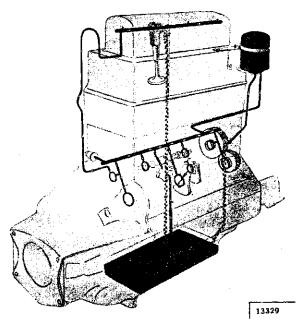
ENGINE LUBRICATION SYSTEM — HURRICANE F4 ENGINE
